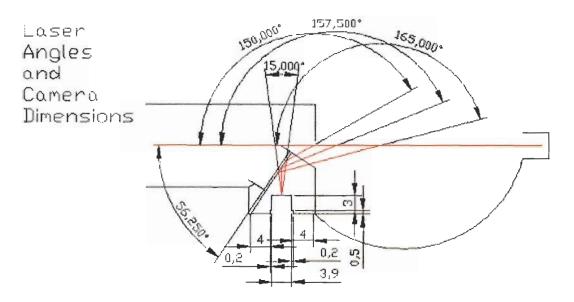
Laser Angles and Camera Dimensions – Shows scattered angles, mirror angle needed, and camera dimensions.
